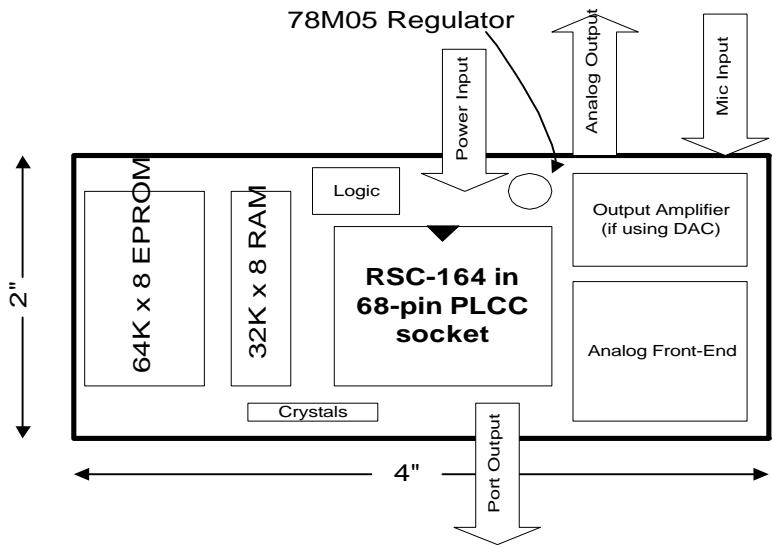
Parts Placement with a Packaged RSC with ROM and RAM chips
